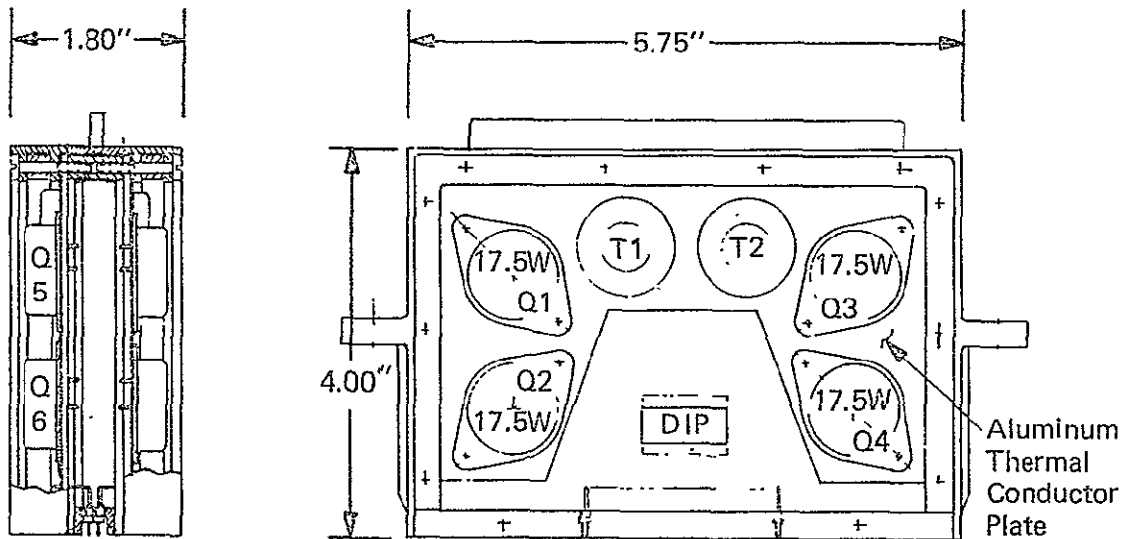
illustrates a Power Switch Module comprised of three single-thickness module frames fastened together to form one completely functional unit. Internally, the unit consists of two identical component assemblies and a common connector. This multiple-thickness module can be reduced to two single-thickness modules if the interconnections between the two modules are made through the mother board. The component boards are made of glass epoxy with a printed circuit on one side and a thermal conductor on the component side for carrying the heat to the outer frame.
